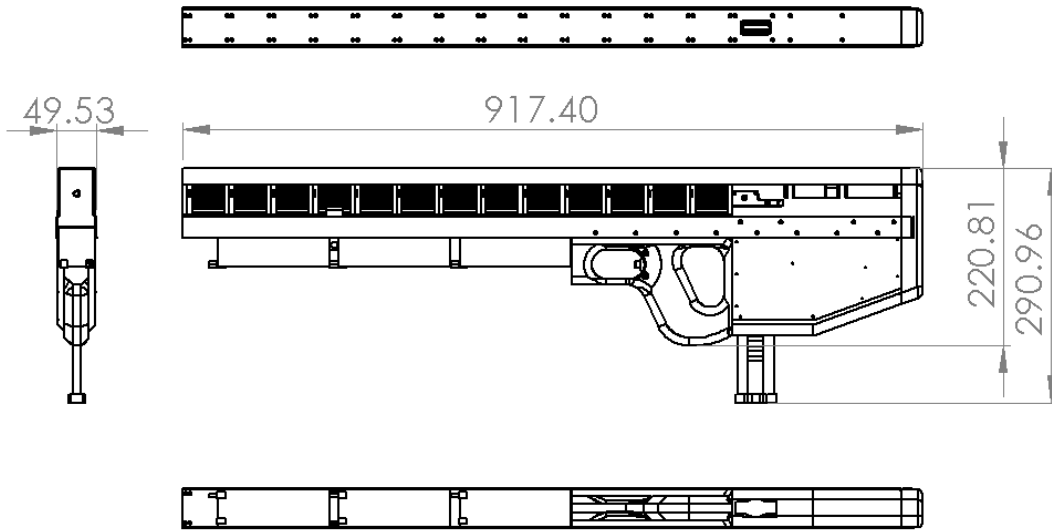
HSCG2020 full assembly with bounding box dimensions, indicated with and without magazine installed. Optics removed.
